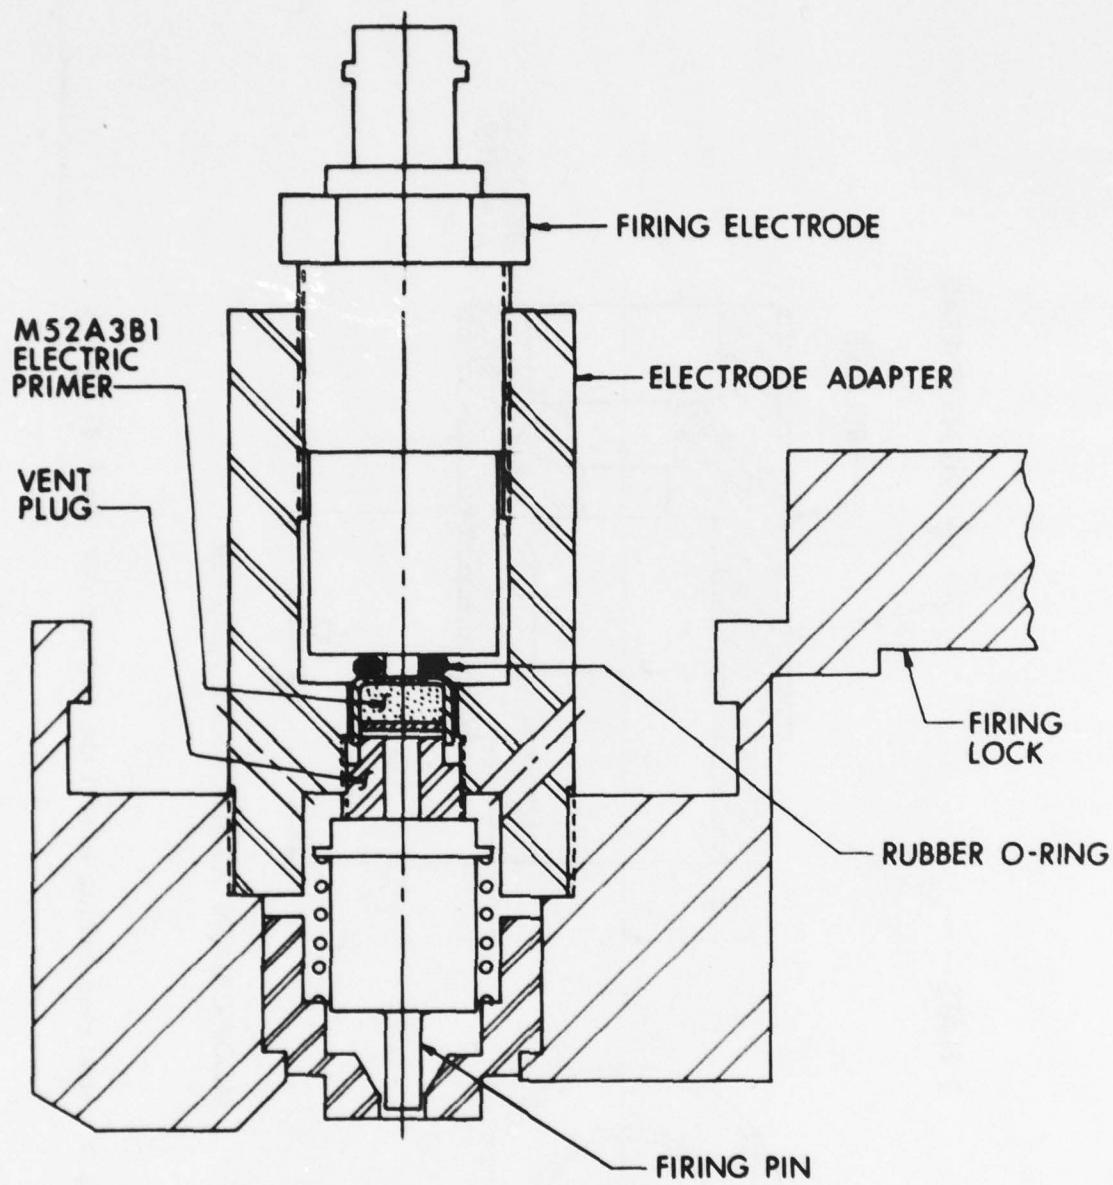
Cross-Section of Assembled Electric Firing Pin Actuator
